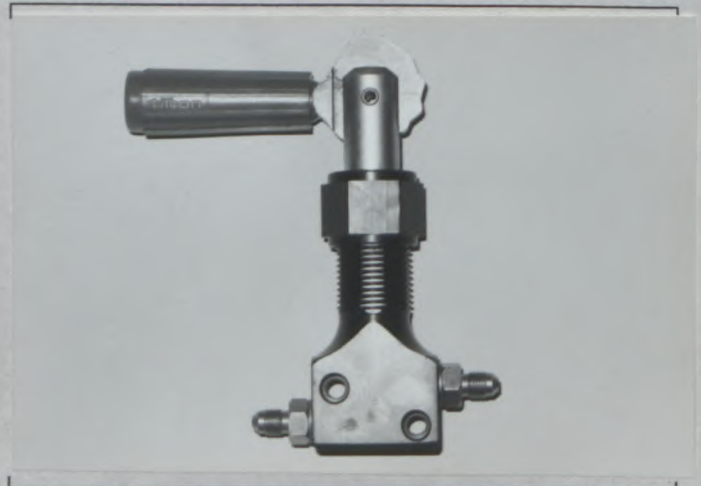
BRAKE PRESSURE ADJUSTER TYPE B
